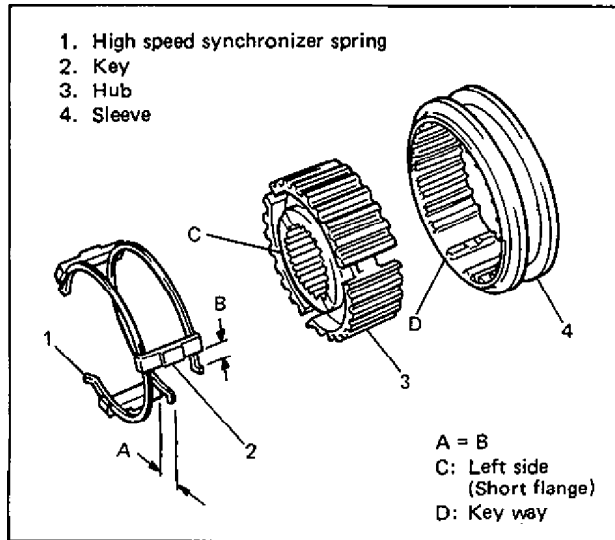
A-43 Assembling High Speed Sleeve & Hub
